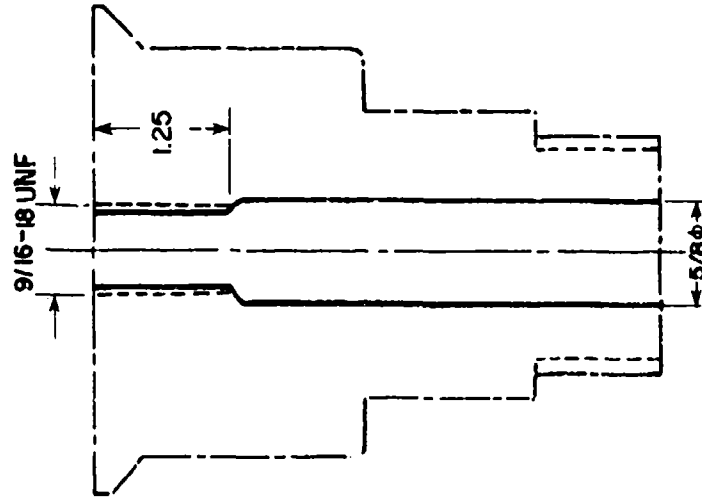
(b) COMMERCIAL DESIGN — DETAILS OF CAPSULE ASSEMBLY.
